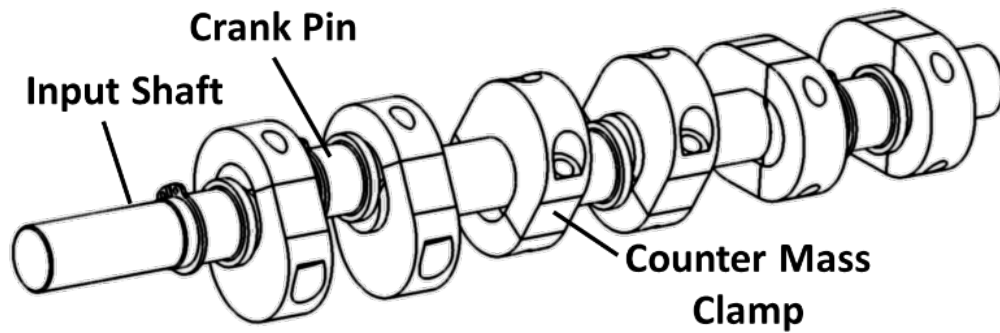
SPLIT CRANK-SHAFT WITH COUNTER MASS CLAMPS
